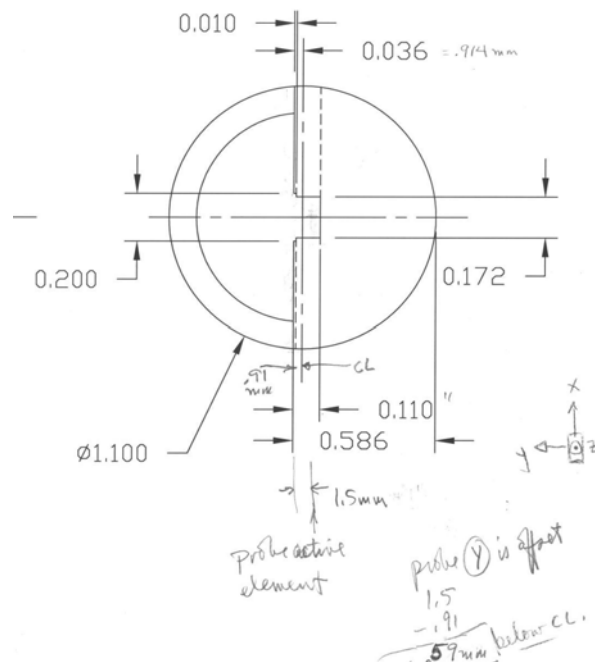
G10 Hall Probe support drawing, showing dimensions relative to center line.
